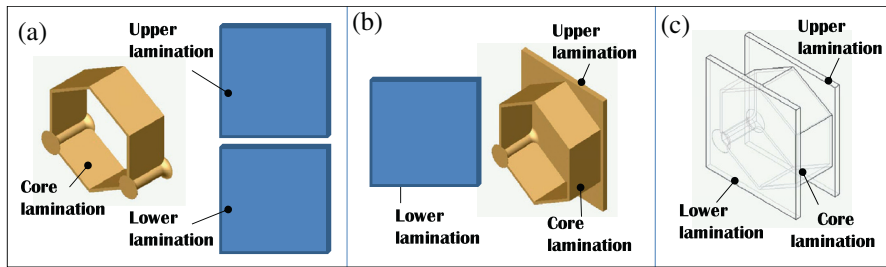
Schematics of the manufacturing methods for honeycomb sandwich plates, which are manufactured by adhesively joining: (a) three parts or (b) two parts (SBHP), as well as using (c) integrated honeycomb technology.
